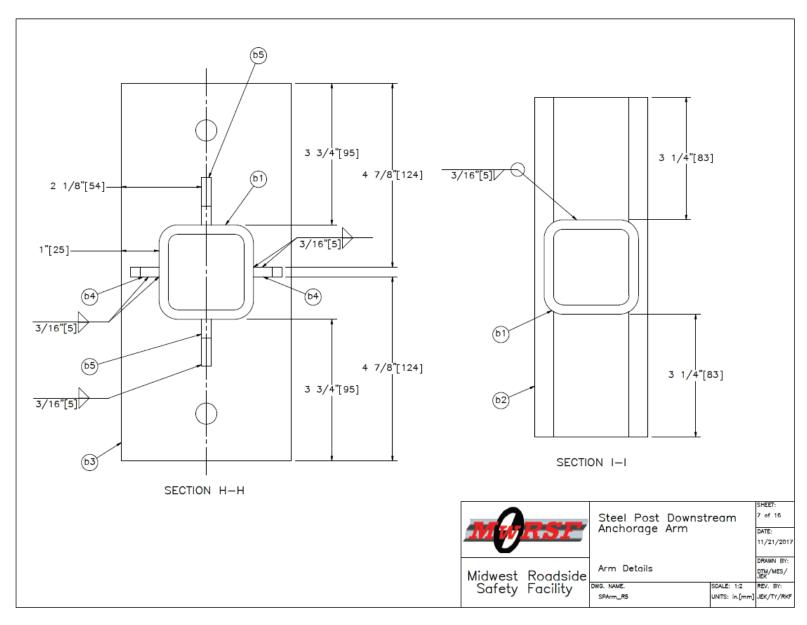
T-Shaped, Breaker Bar Design – Arm Details
